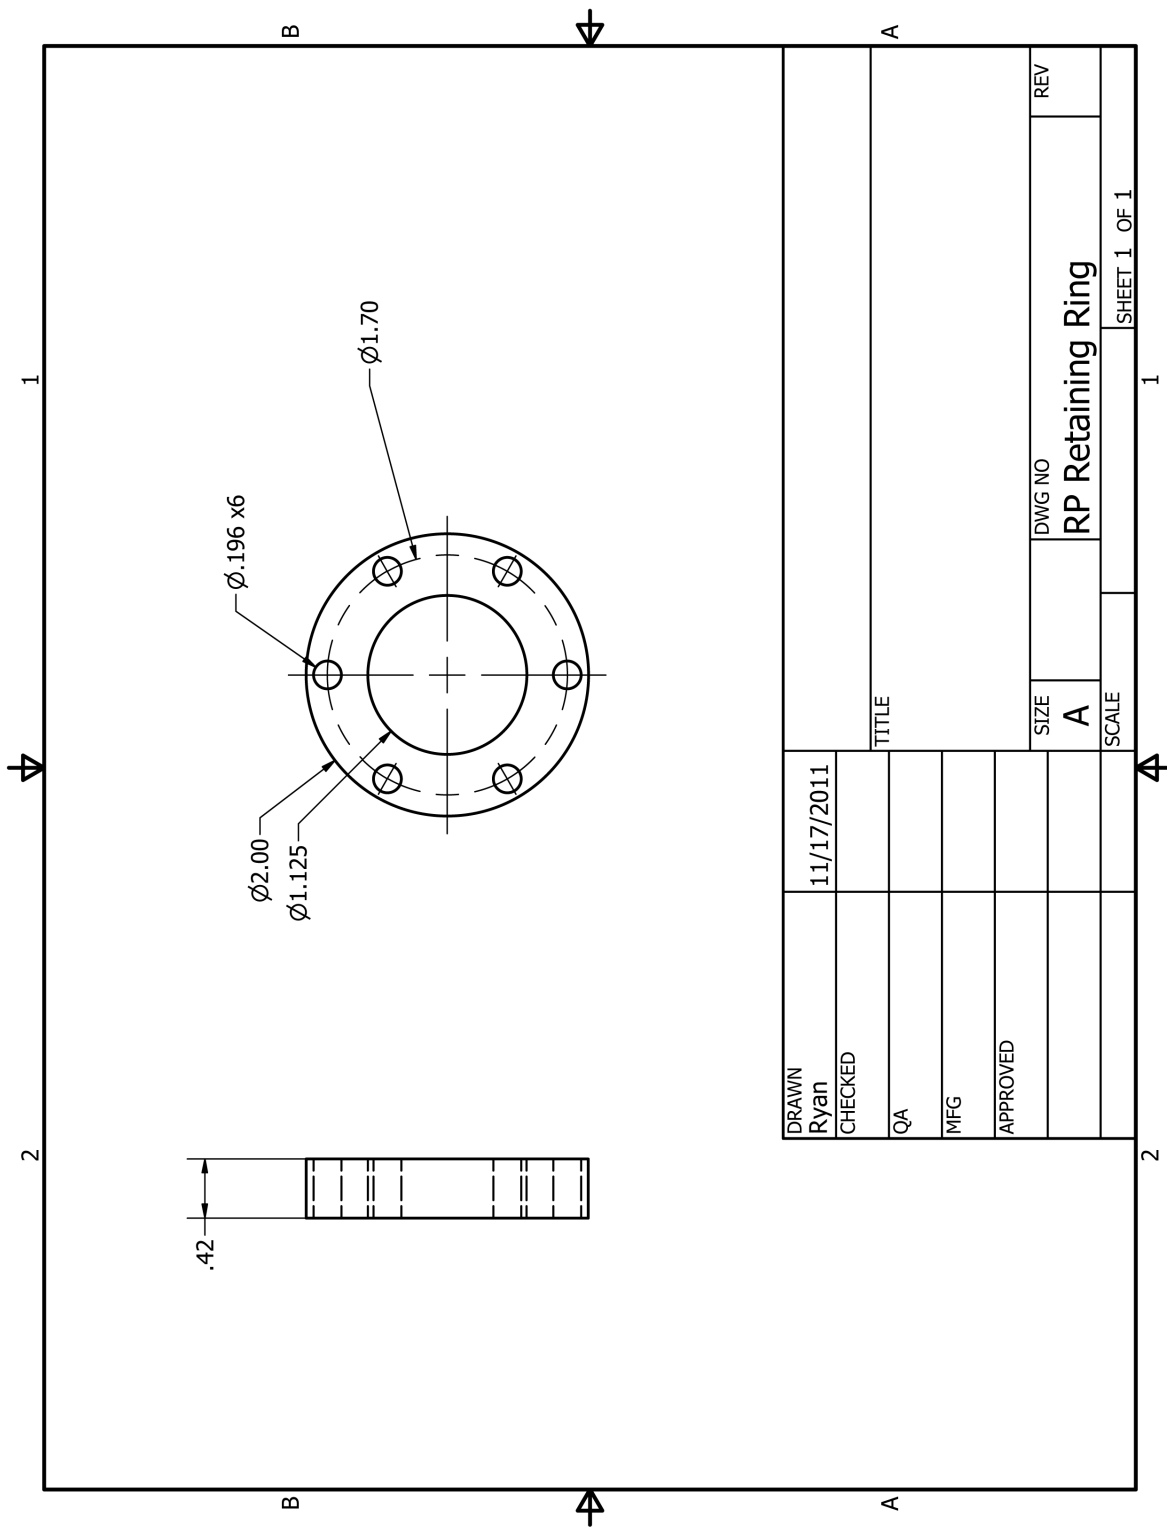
Metal retaining ring to reinforce nozzle mounting
